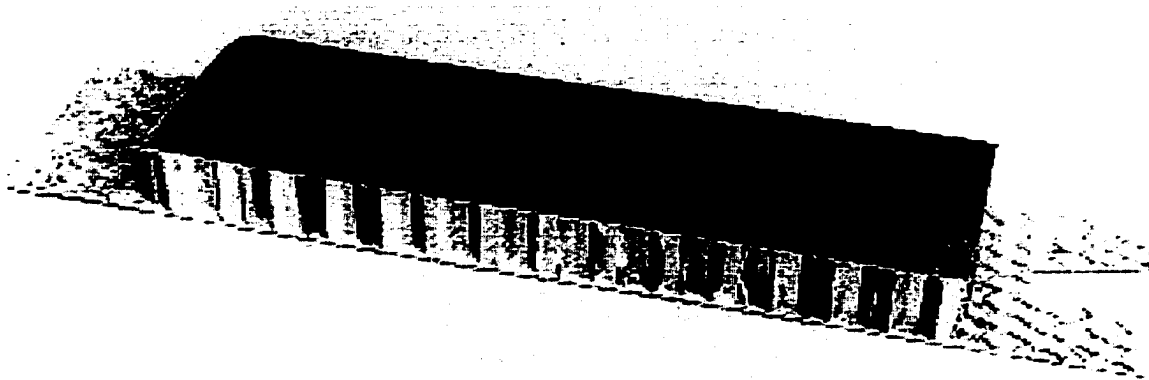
Drum peel test specimen prepared from an aluminum honeycomb core panel [47].
